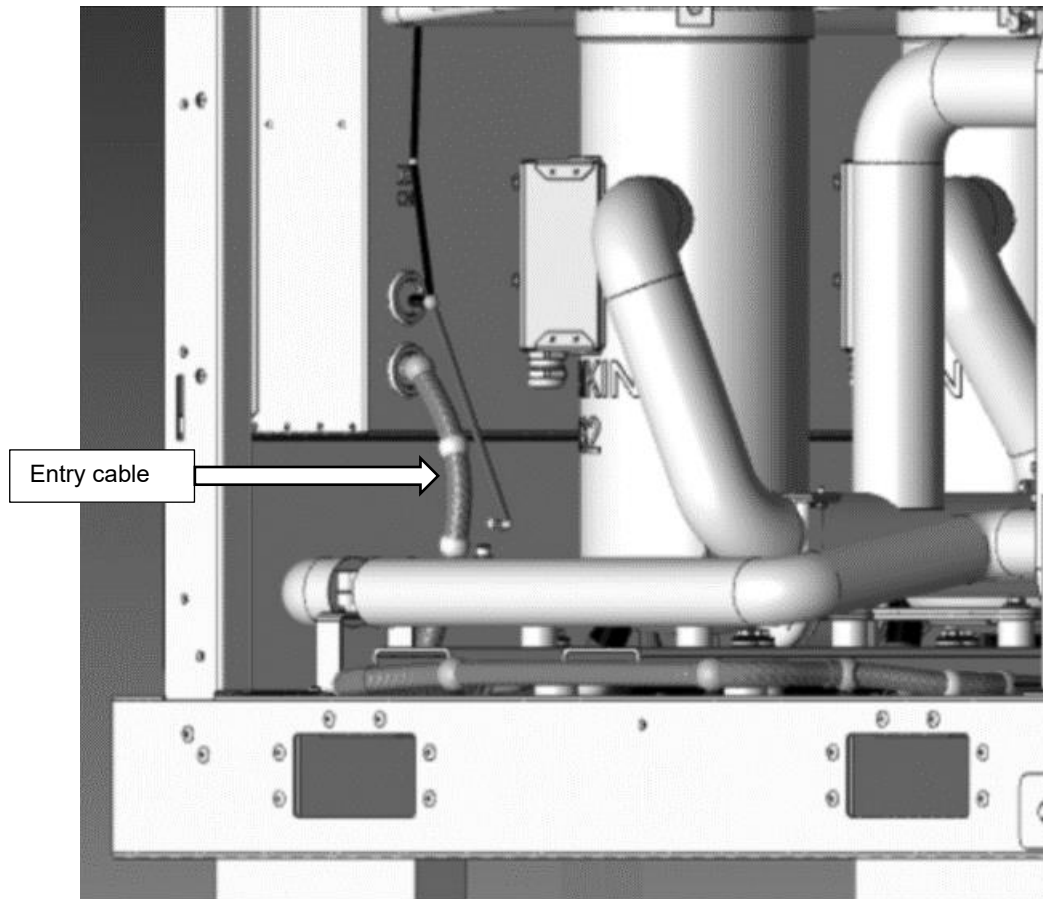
Electrical panel entry for evaporator and condenser shut off valve actuator cables
